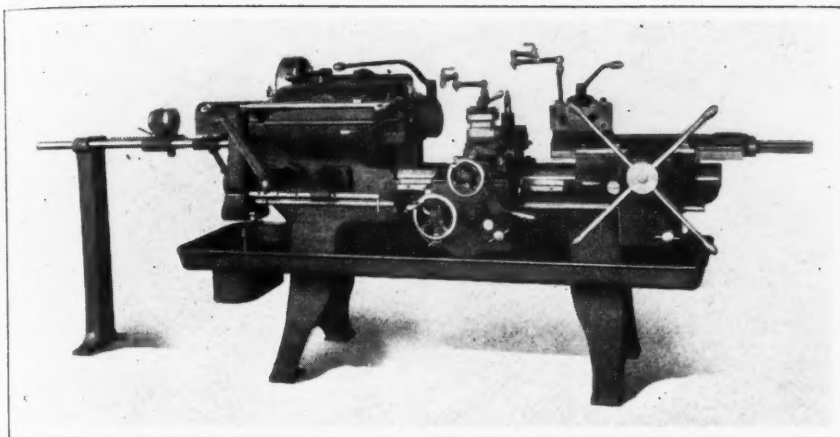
Foster Turret Lathe with Eight-speed All-gear Head
